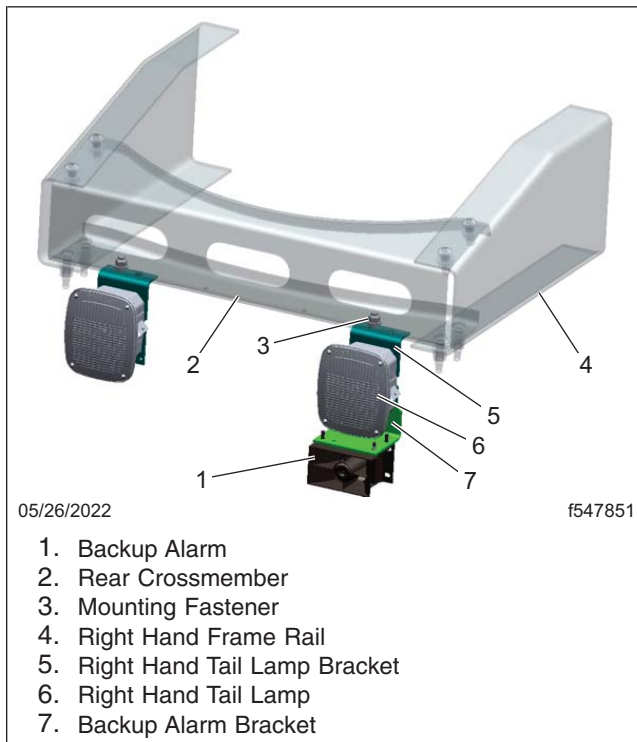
, Tail Lamp Bracket Removal from the Rear Crossmember
